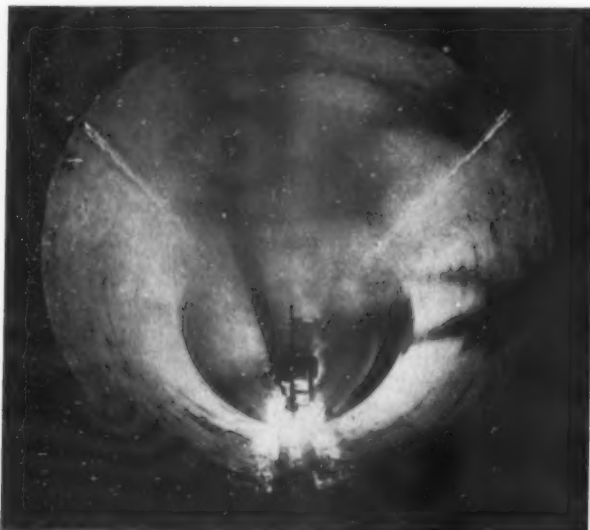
Welding an inner longitudinal seam of an aluminium tank car by tractor-type carbon arc welders.
